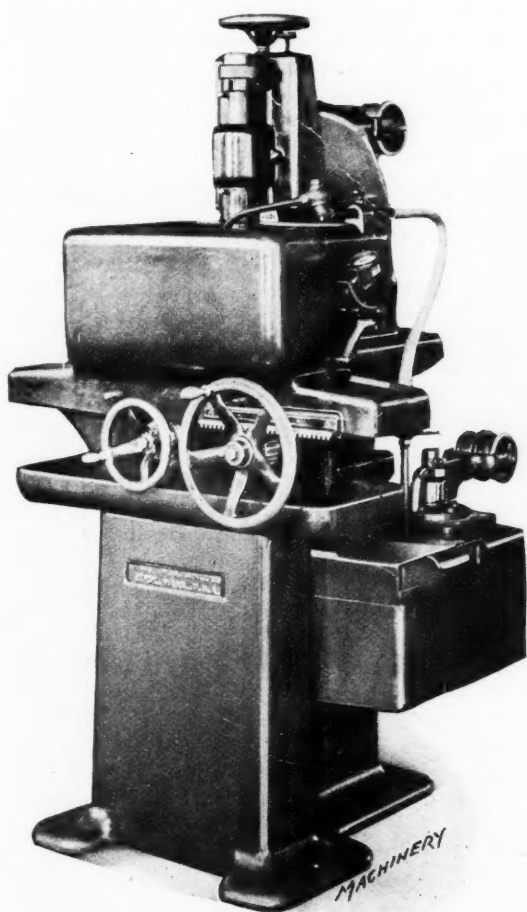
Union Twist Drill Co.'s No. 2 Formed Cutter Grinder
